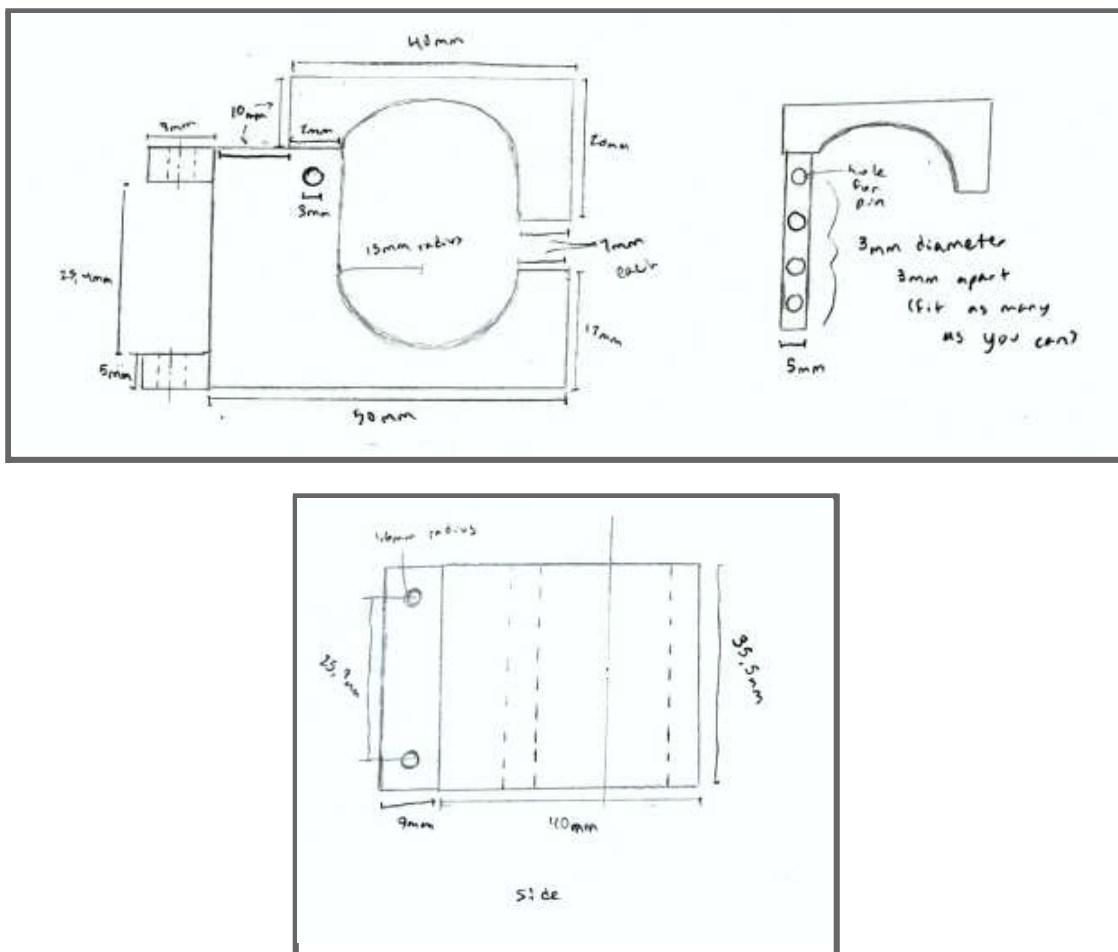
First engineering drawing of corrosion remover and painting end effector
